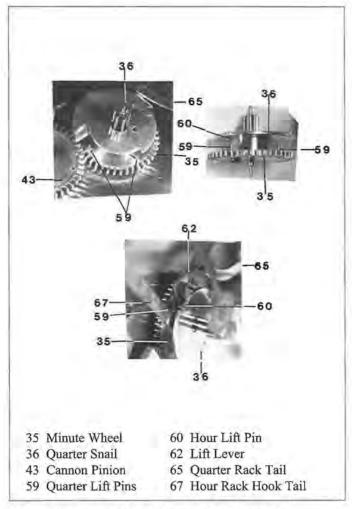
Minute Wheel/Quarter Snail Assembly
